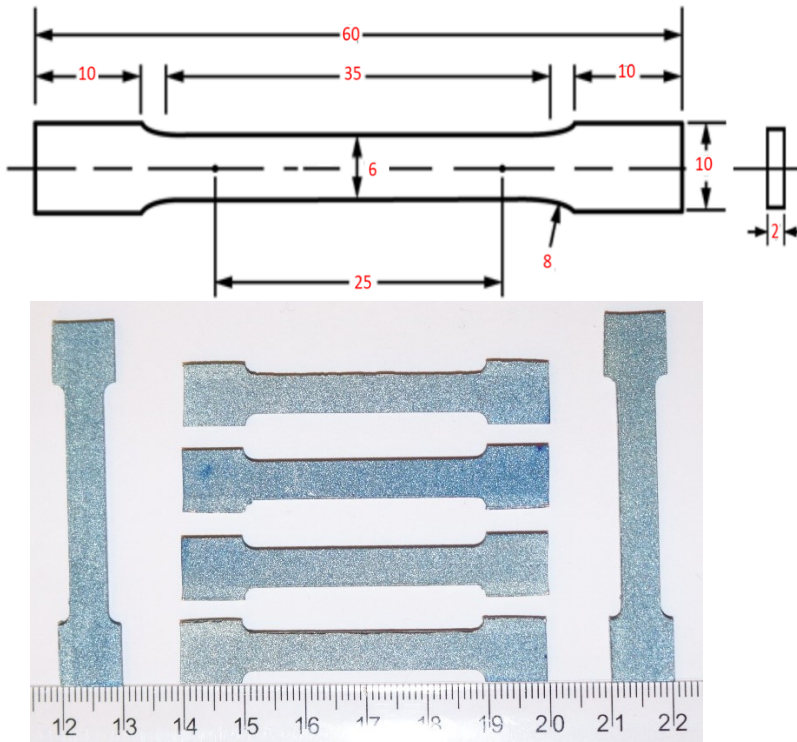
Dimensions of the manufactured Ti6Al4V tensile samples
